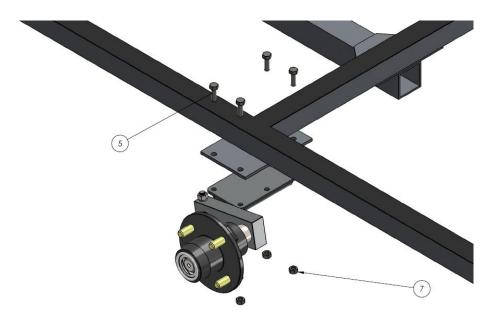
Assembly diagram of torsion suspensions axles mounting to frame
